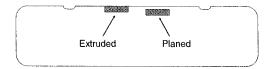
Extruded profile showing cutting sites for extruded and planed samples.
